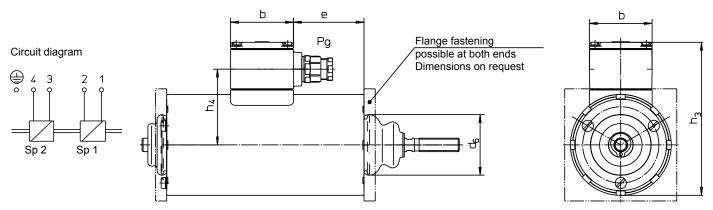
Type G TU W 040 T 43 A02 to G TU W 090 T 43 A02
